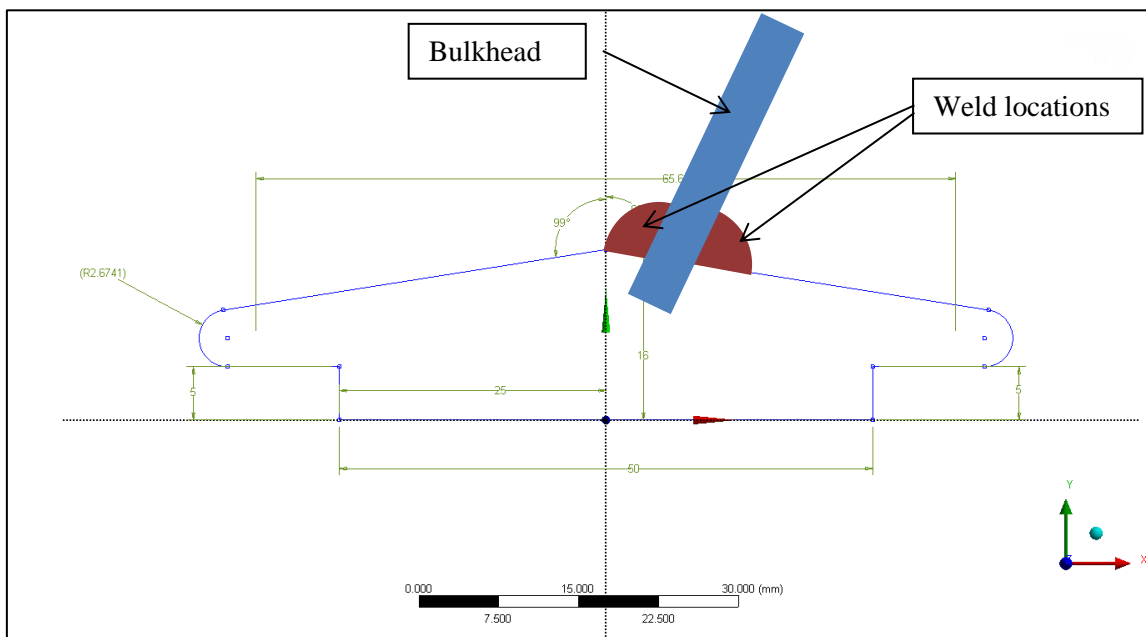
Band extrusion profiles for GRW tanker J3910 (dimensions approximate) with bulkead and weld locations shown
